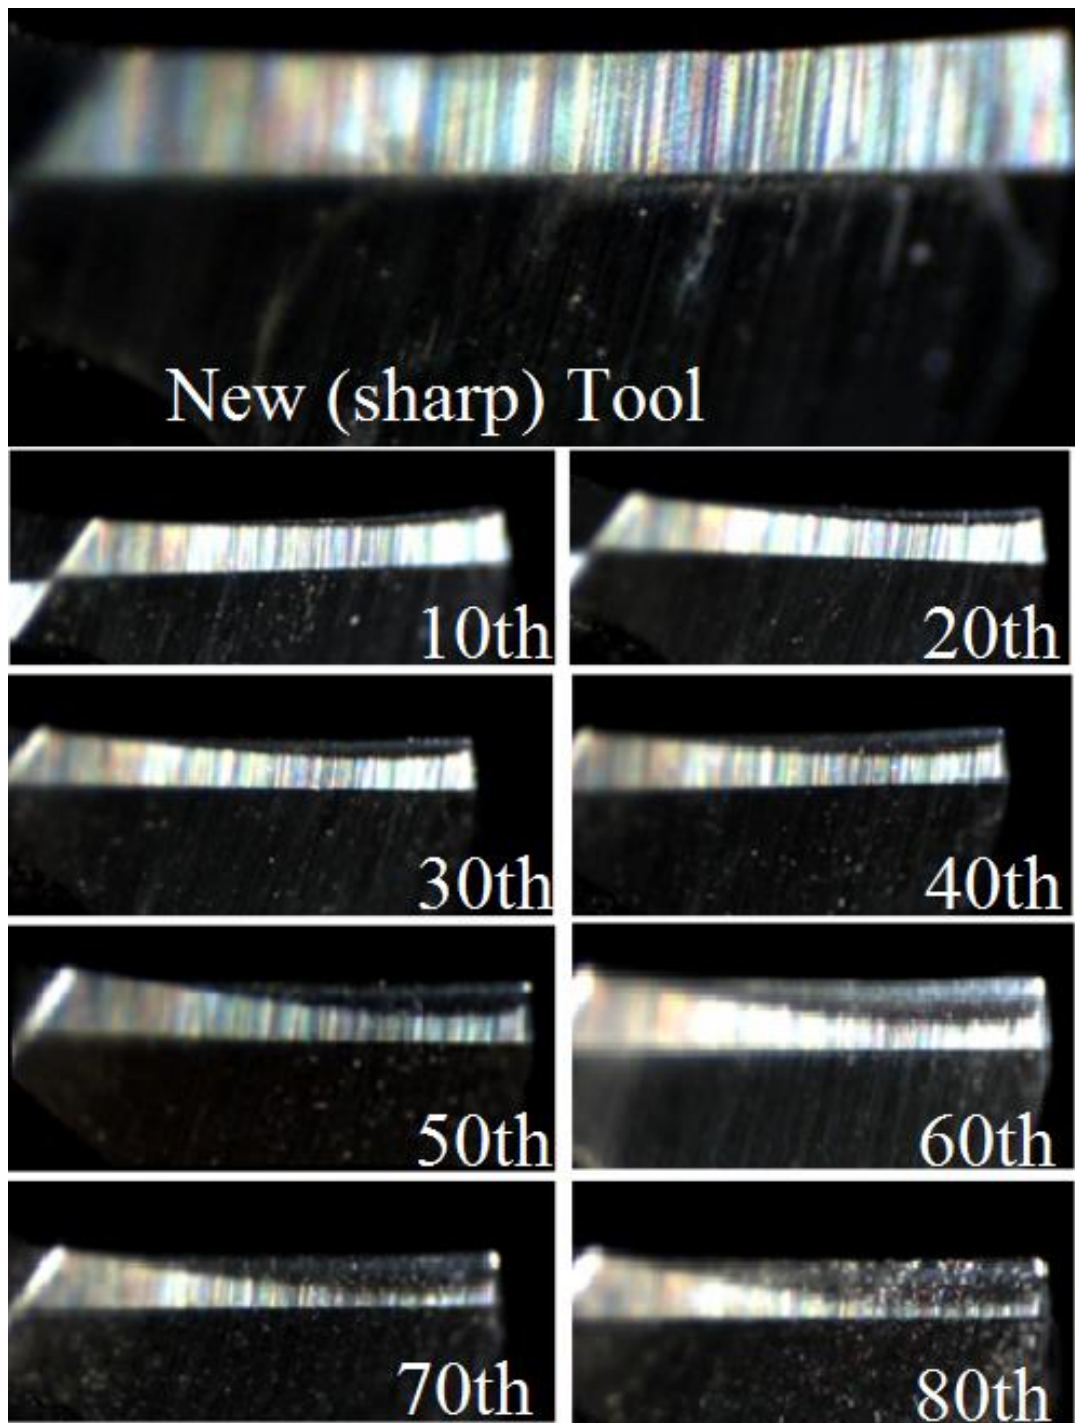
Optical image of the cutting edge of drilling Condition II
